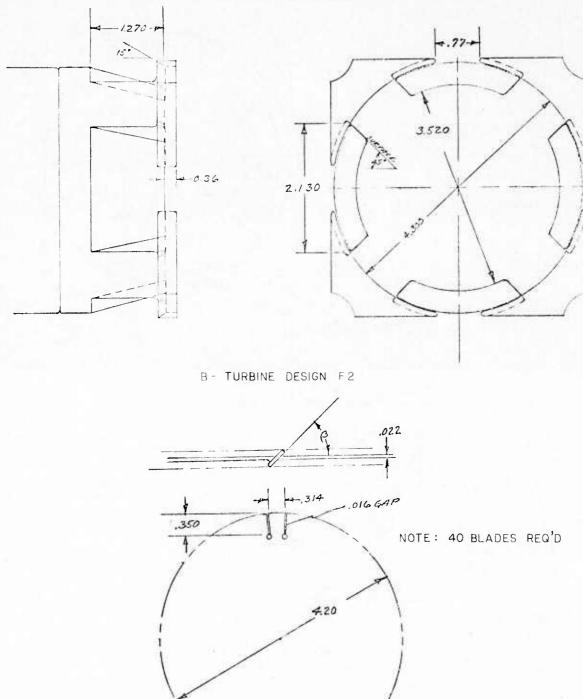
T2 Fin Support Ring and F2 - F6 Turbine Wheel Design
